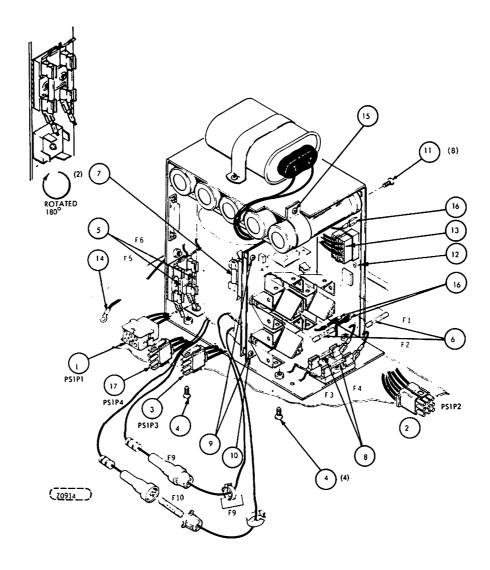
, POWER SUPPLY ASSEMBLY
